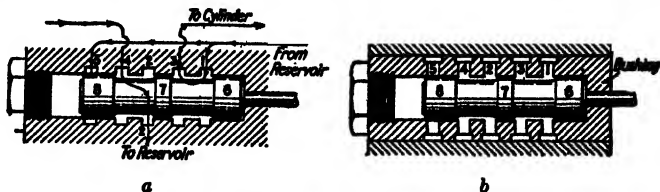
In (a) the inside grooves, or recesses, in the valve chamber are numbered 1 to 5; the "lands" on the valve plunger are 6, 7, and 8, with the "spools" between. In (b) are shown the radial holes 1 to 5 and the connecting grooves in the bushing that, in this construction, forms the valve chamber. In either (a) or (b) the connecting oil pipe may enter the given groove at any point.
